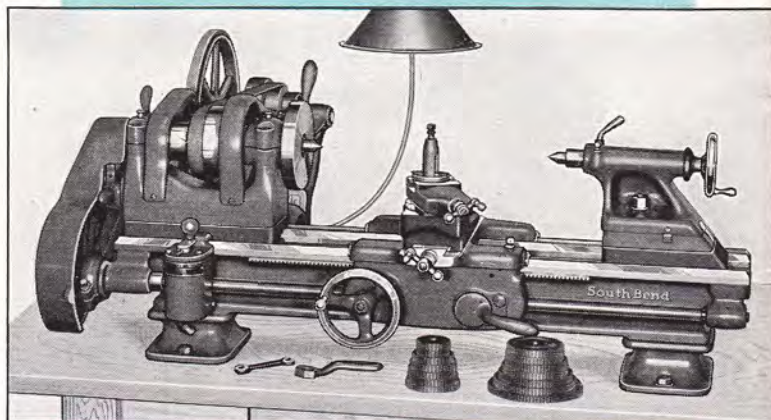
Cat. No. 6415-YA, 9"x3' "Workshop" Precision Bench Lathe with Raising Blocks and Adjustable Horizontal Motor Drive, complete as shown, but less bench\$146.00
